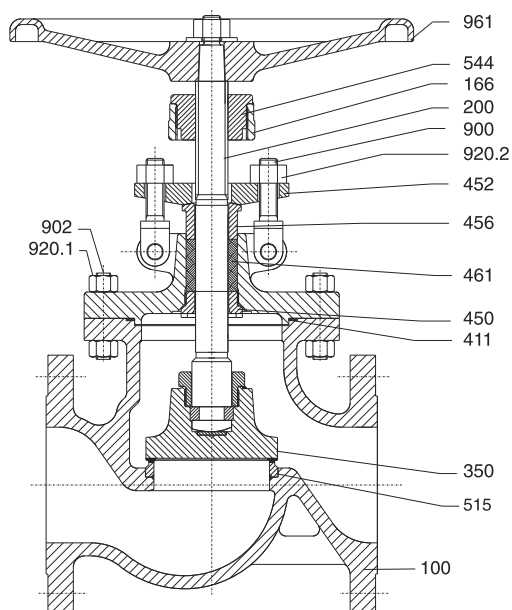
Sectional drawing of SICCA 150-600 GLC
